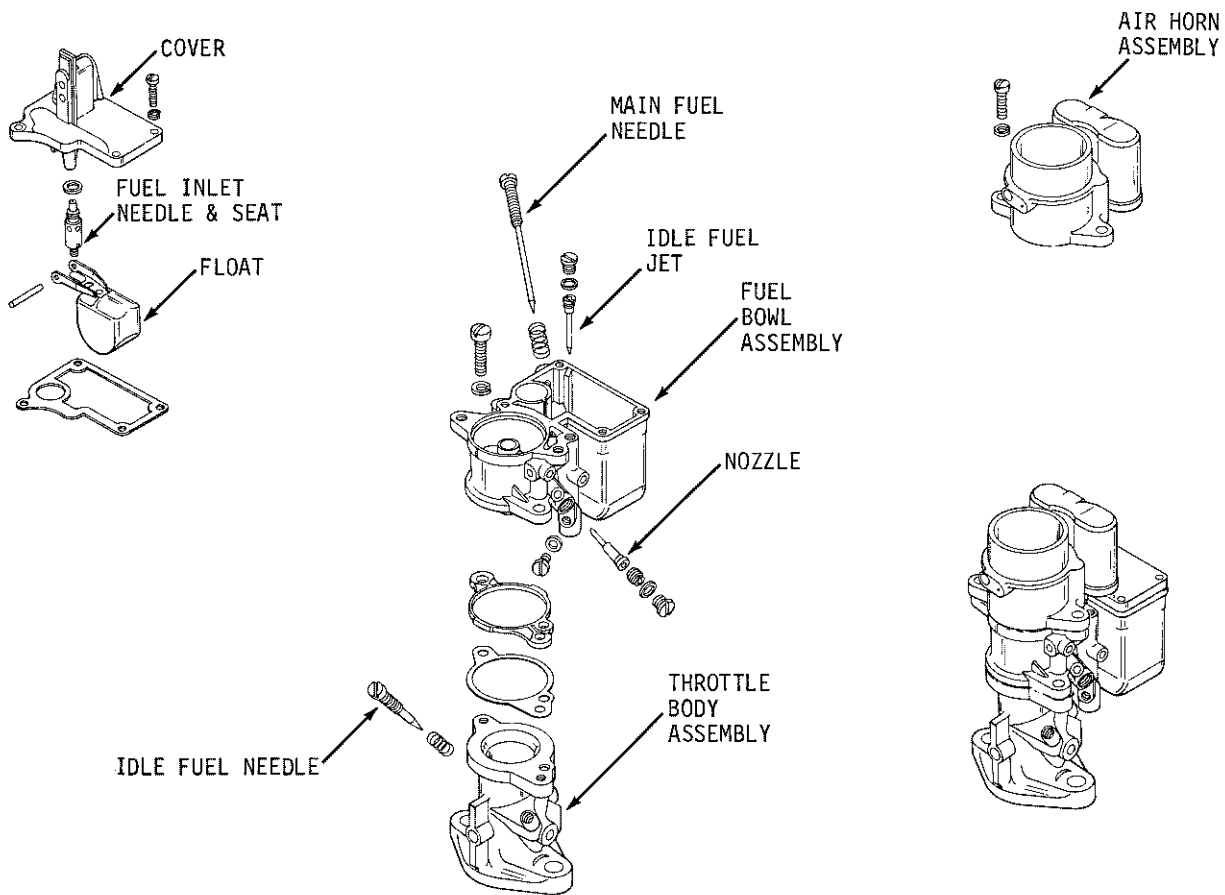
DOWNDRAFT CARBURETOR -- K662
